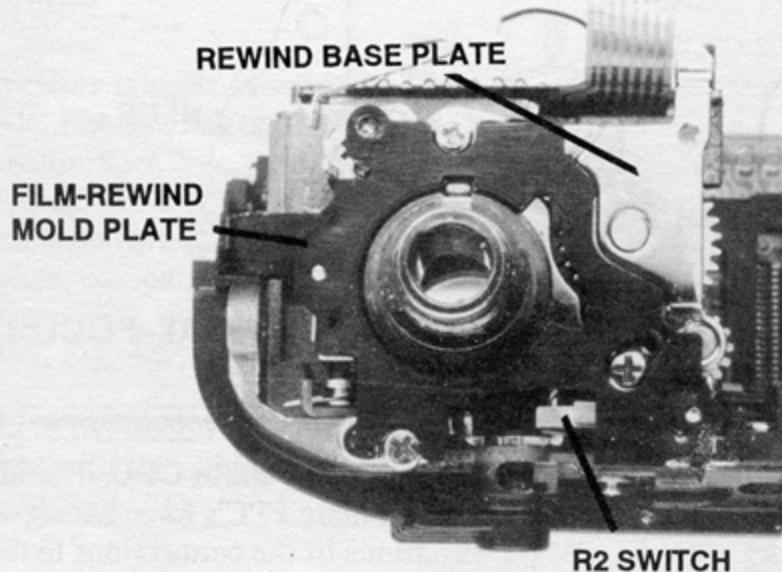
TOP VIEW, ISO BASE PLATE REMOVED
